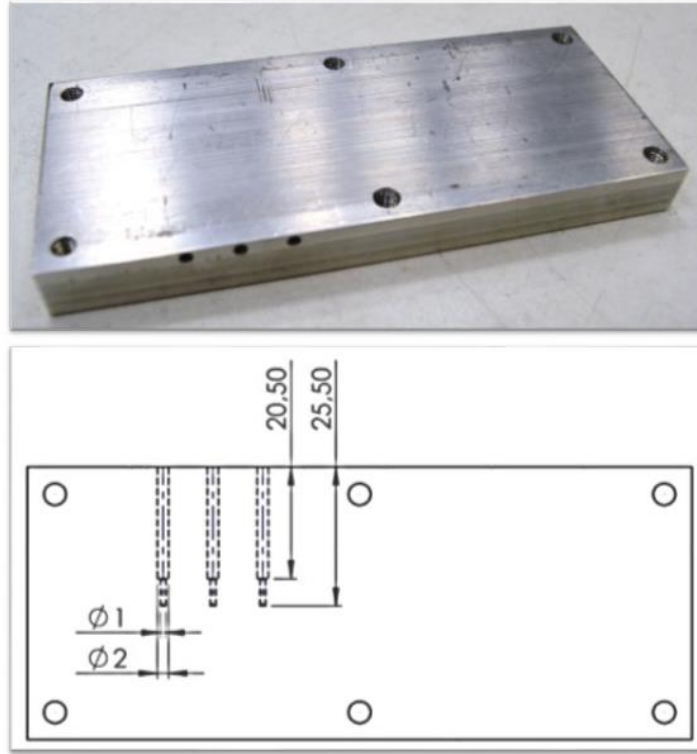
View of the aluminum bottom side and CAD drawing of the thermocouples venues.
